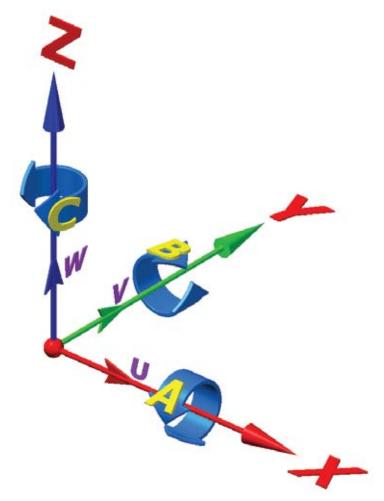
The spindle head and the spindle quill move along parallel axes.
